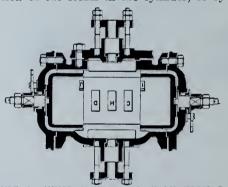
WEIR STEAM VALVE, SECTIONAL PLAN.
